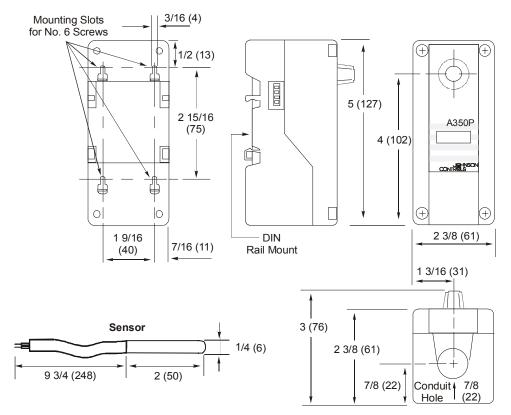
A350P Control and Sensor Dimensions, in. (mm)
